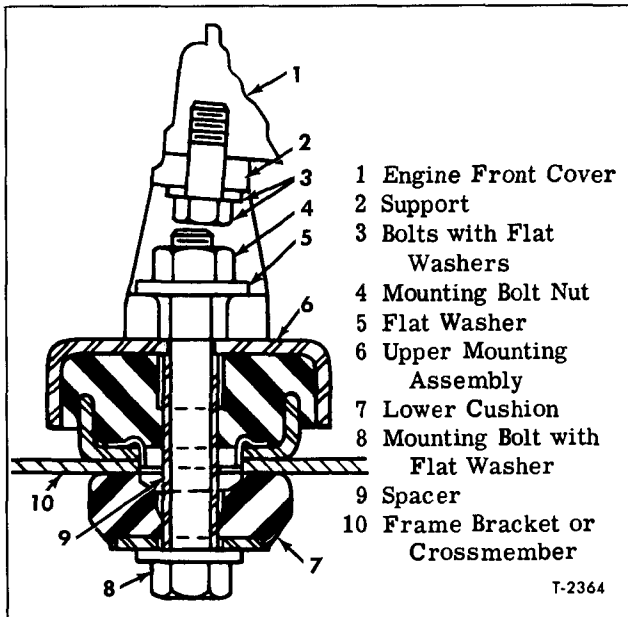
Engine Front Mounting on Conv. and Tilt Cab Models (V6 Gasoline Engine)
